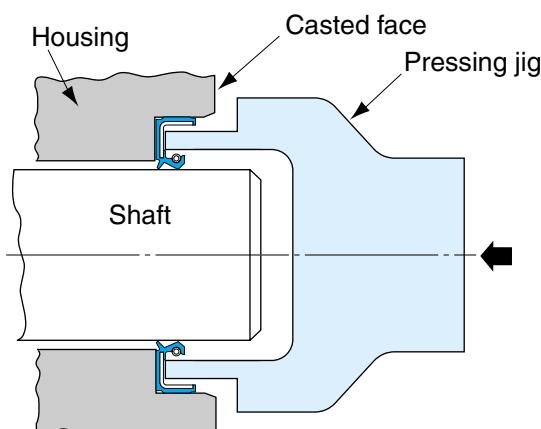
Seal press-fitting jig for shouldered housing bore
